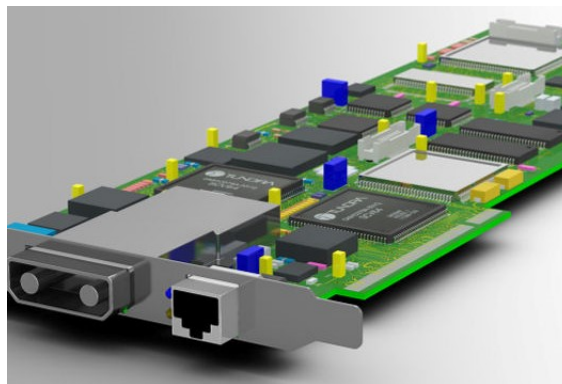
PCB designed in ECAD (electronics design solution) [18]
